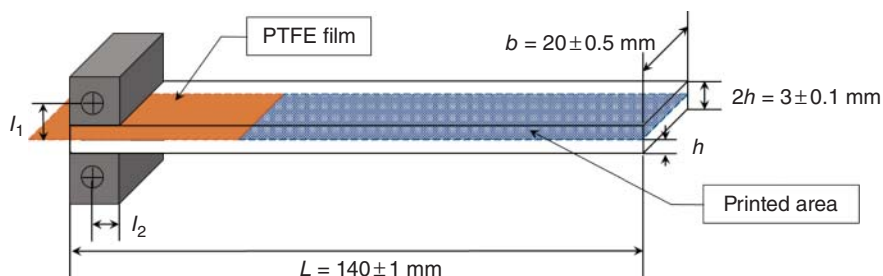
A schematic showing the test sample setup for the DCB test, a PTFE film is inserted to initiate cracking.
